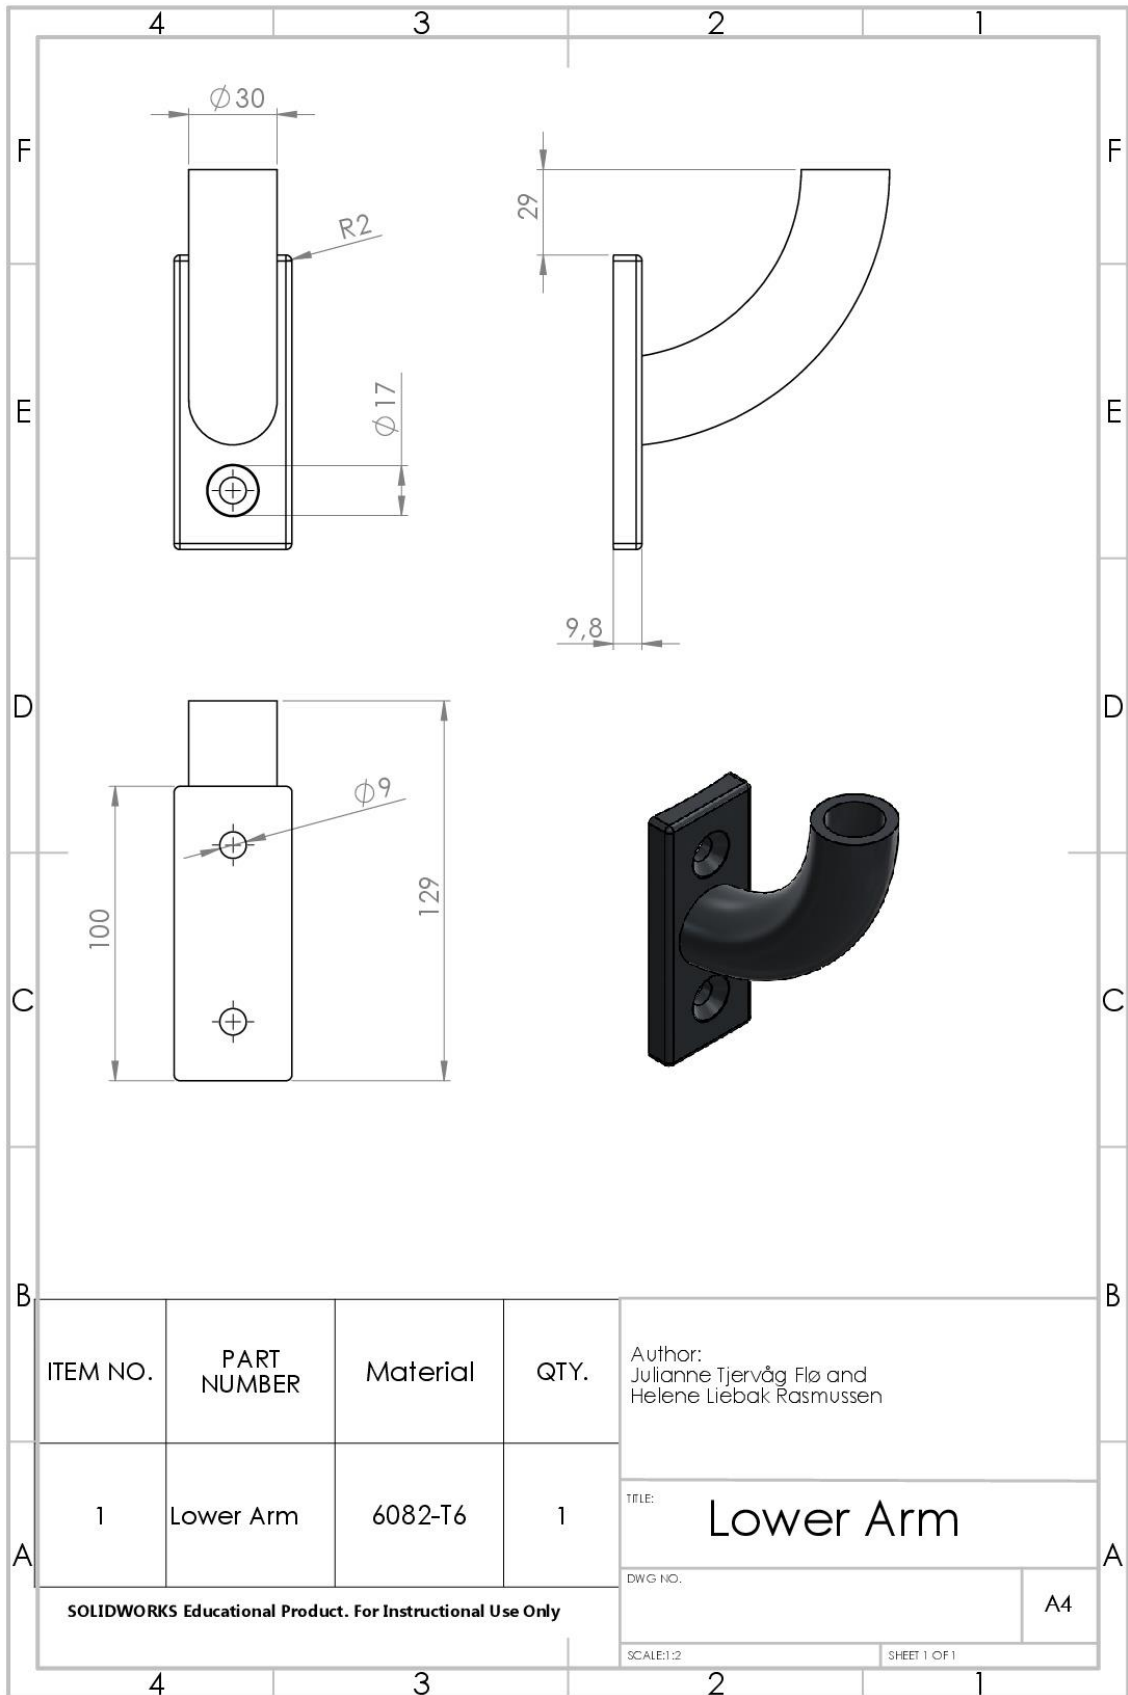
Technical drawing of the lower arm. Created in SolidWorks.
